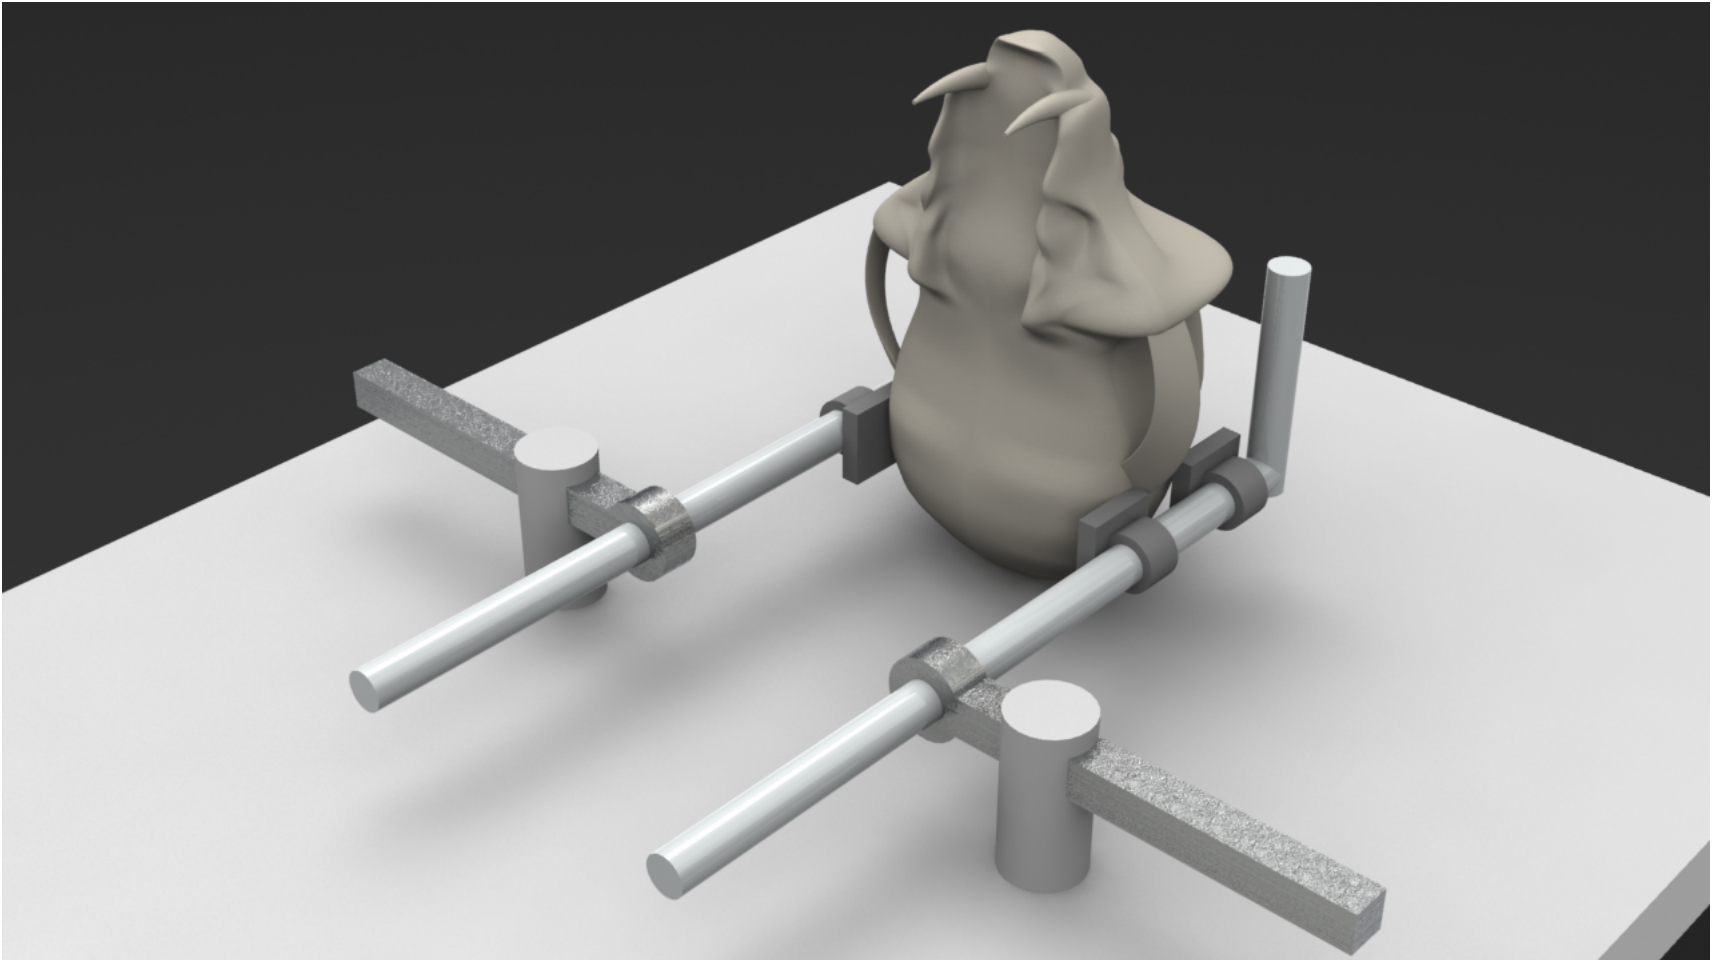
SolidWorks drawing of Fork Support design. Drawing created by Gabe Bautista [7].
